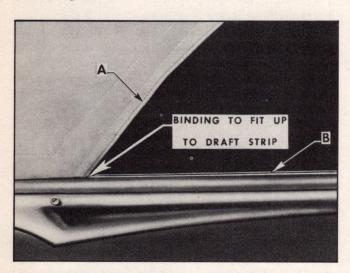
Rear Quarter Curtain to Outer Draft Panel Fit
